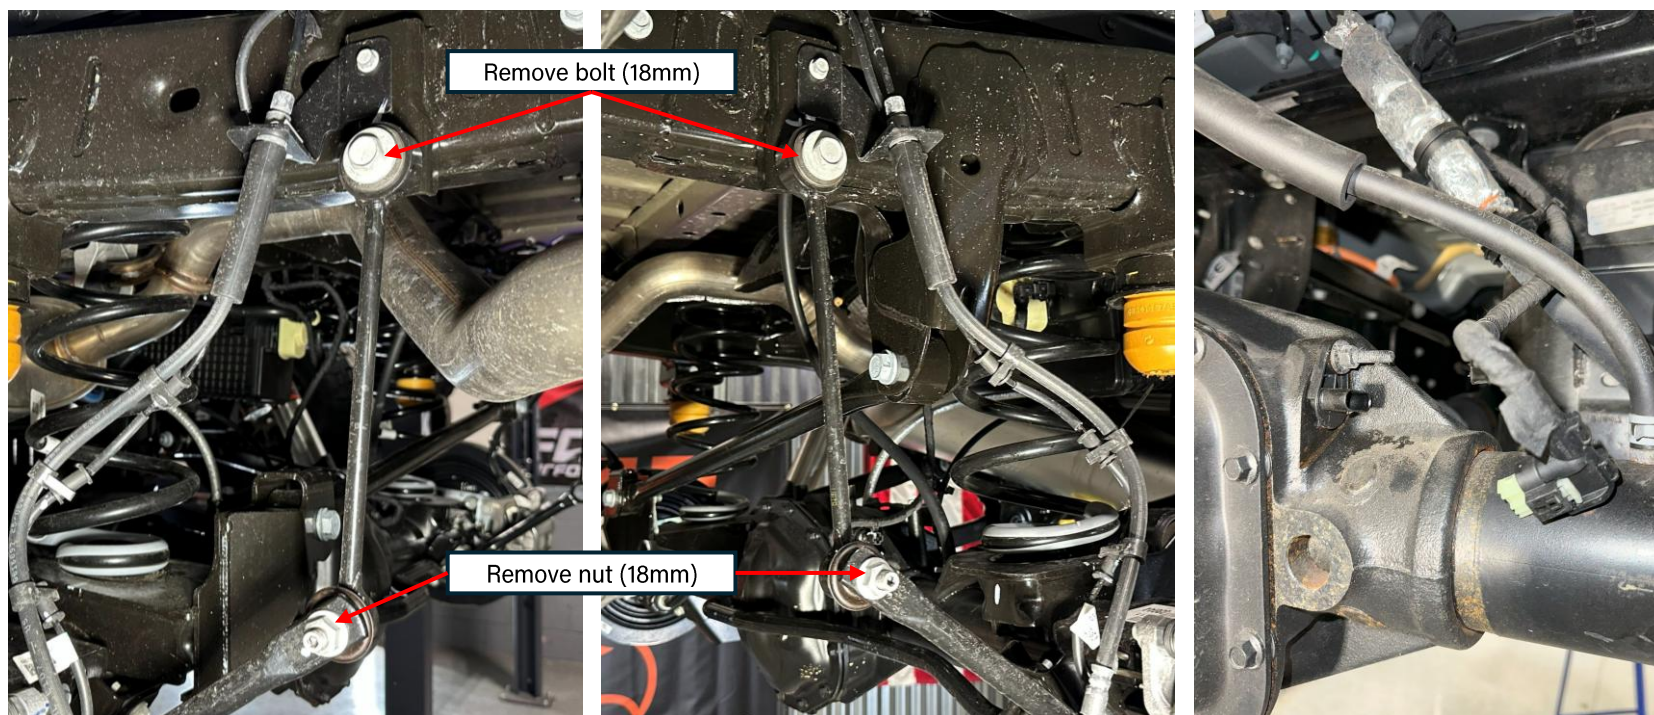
Rear passenger/driver sway bar end link before removal, and differential sensor and hose removed
